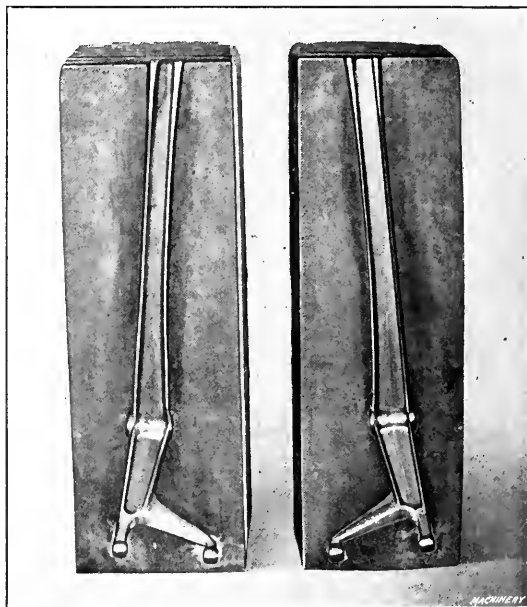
Upper and Lower Dies used in Steam Hammer shown in Fig. 63 for finish-forming the Ford Front Axle
